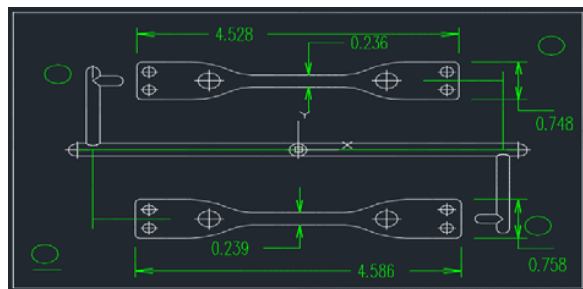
AutoCAD drawing of specimen part and dimensions (In)
